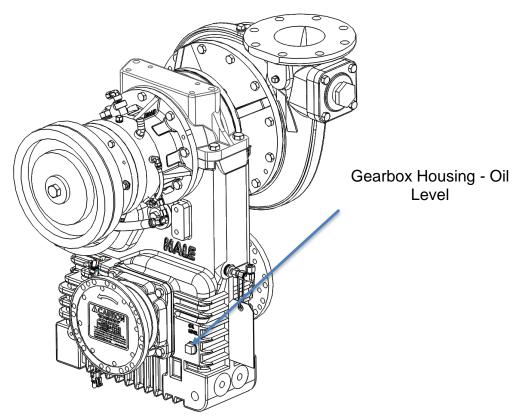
Gearbox Oil Level Check Location (DSD Version Shown)
